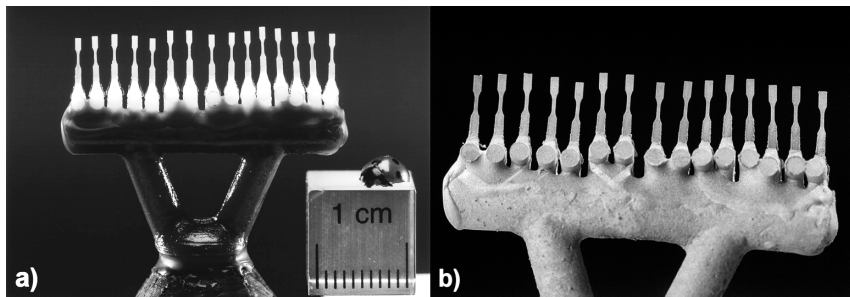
a) Pattern with 15 injection-molded polymer tensile test specimens fixed on a sprue system made of wax; b) equivalent cast part manufactured in a gold base alloy
